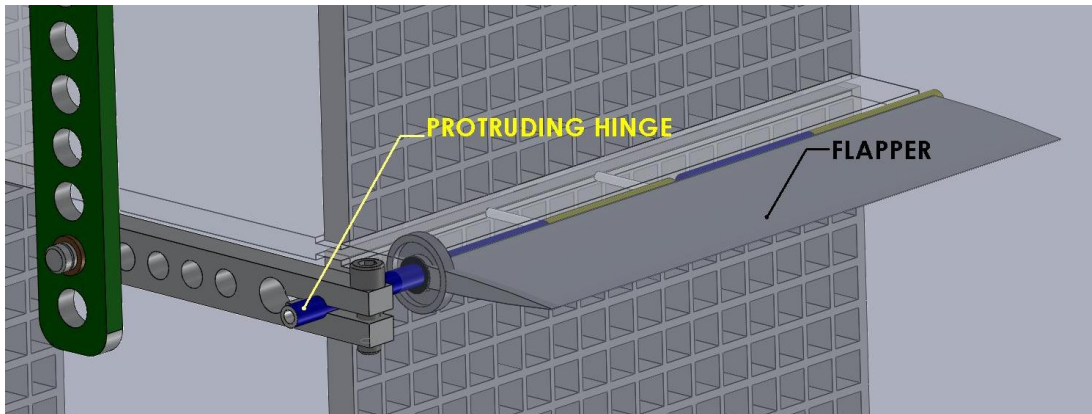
Flapper design shows the hinge protruding through the channel wall. The hinge is welded to the flapper and connects to the lineages via securing clamp.
